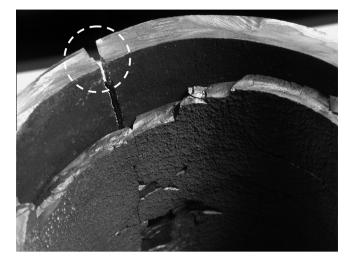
Detail (inner view) of lab-induced fracture by longitudinal cutting.
